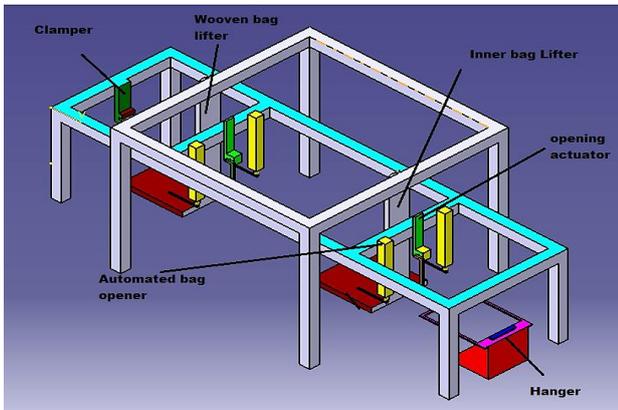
Isometric view of the desing concept for Automated Polypropylene Bag Assembly System.
